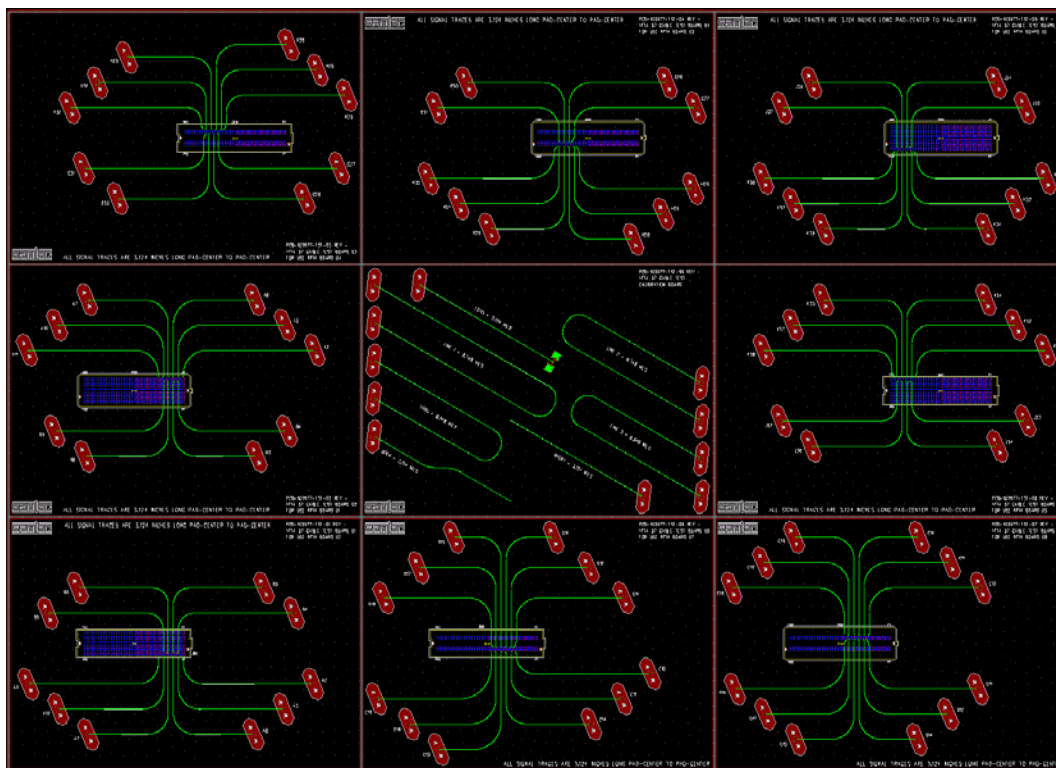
PCB-103977-TST-XX and PCB-103977-TST-99 Artwork
